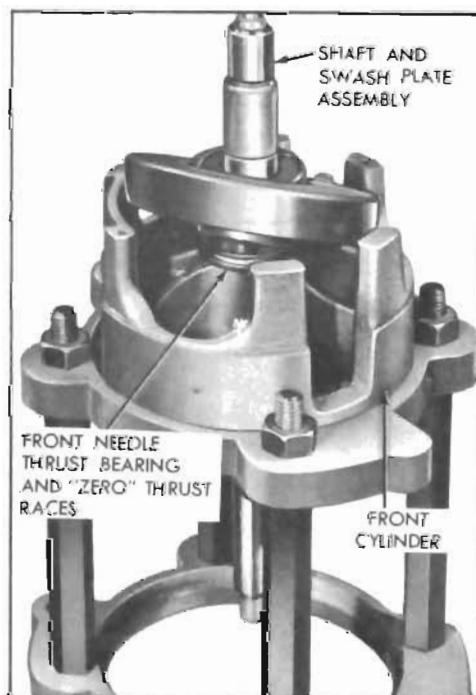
Shaft and Front Needle Thrust Bearing in Cylinder Half
